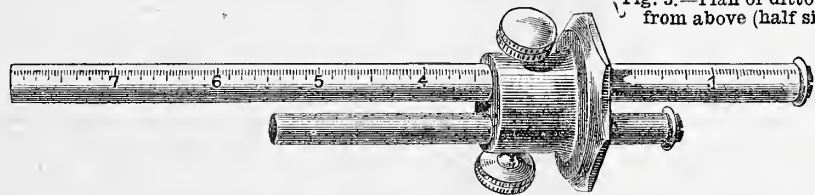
Barrett's Improved Combination Roller Gauge (half size).
